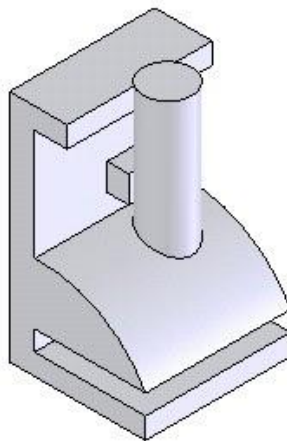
Sketch extruded using the Up To Vertex option
